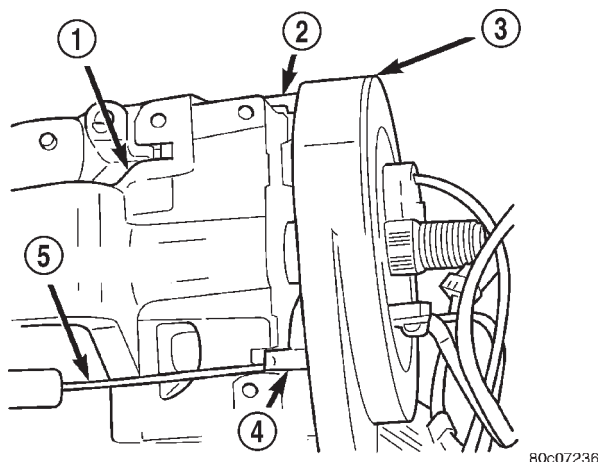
Steering Column Shrouds Remove/Install - Typical
